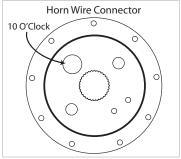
& Diagram: Next we will install the steering wheel adapter. We will use adapter P/N 53-357. This adapter is polished to match the steering wheel. The female tube on the turn signal switch for the horn wire connector must be clocked at 10:00 with the steering wheel installed and the wheels and tires straight forward. If the tube is not clocked at 10:00, the turn signal canceling mechanism will not work properly. With
